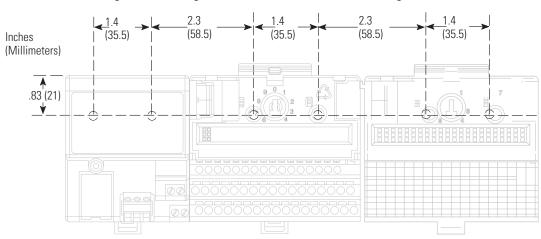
Drilling Dimensions for Panel/Wall Mounting of FLEX I/O
